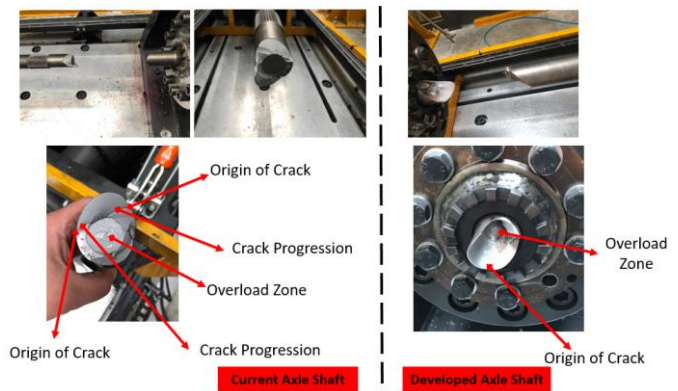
Current and Developed axle shaft failure analysis
